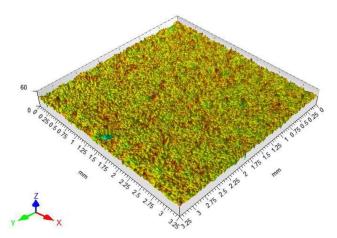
An example of surface morphology of the flexible adherend after sand blasting process
